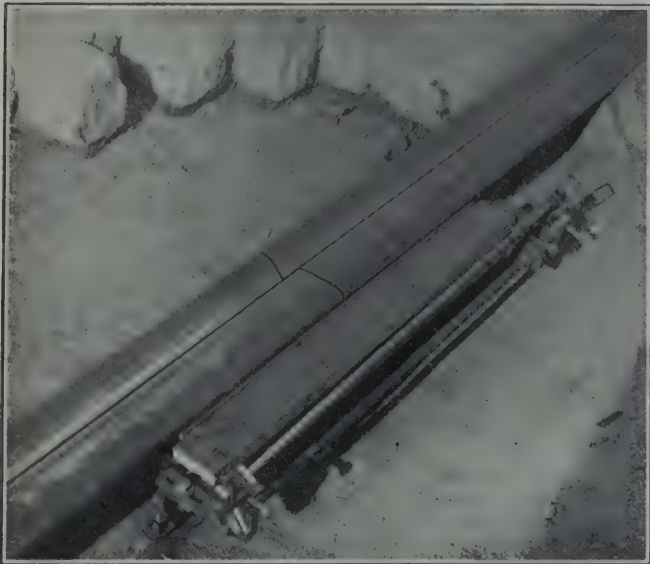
APPARATUS FOR ARC WELDING OF JOINTS
